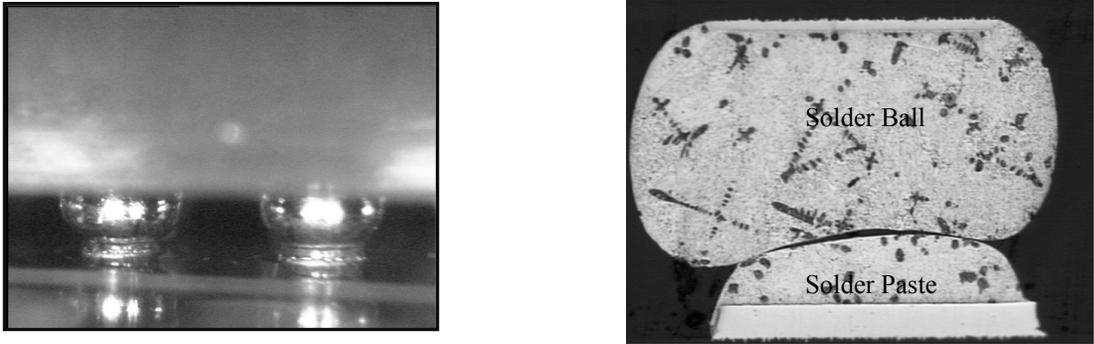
Sideview and Cross-Section Images of a Head in Pillow Defect
